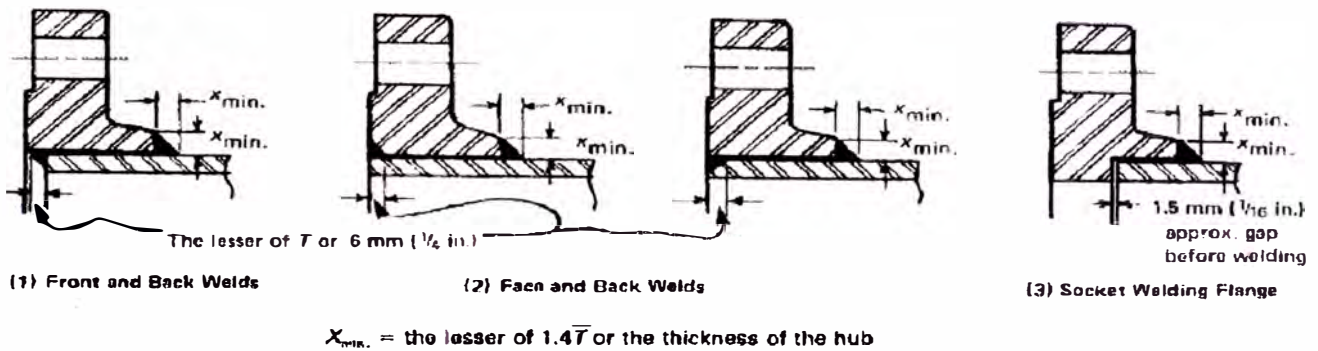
B TYPICAL DETAILS FOR DOUBLE-WELDED SLIP-ON AND SOCKET WELDING FLANGE ATTACHMENT WELDS
